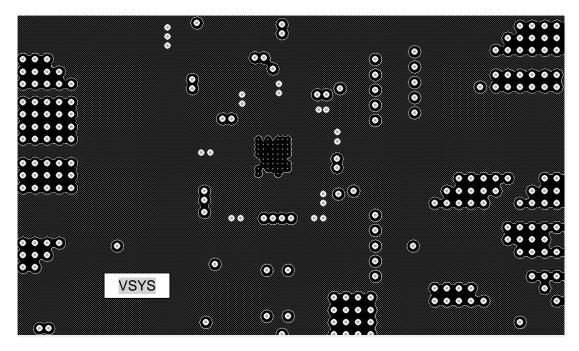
BD71815AGW Reference Board Breakout (Layer 3)
